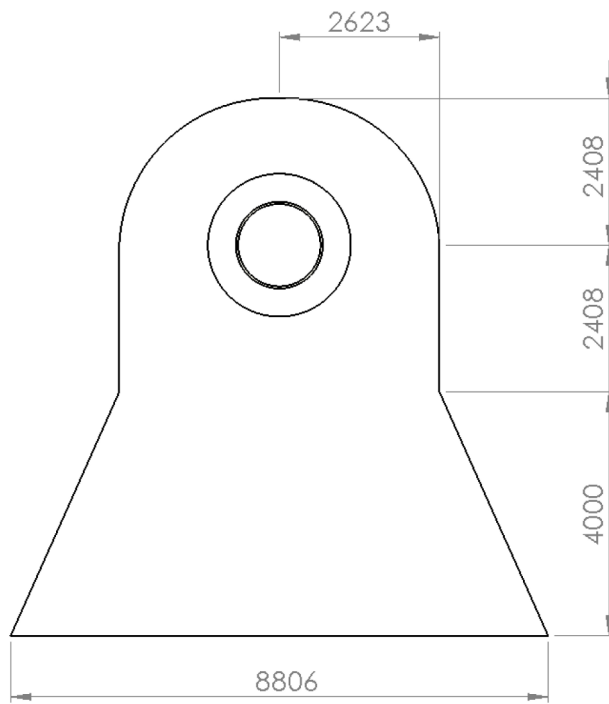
Final Hood Geometry Dimensions on Front Plane [mm]
